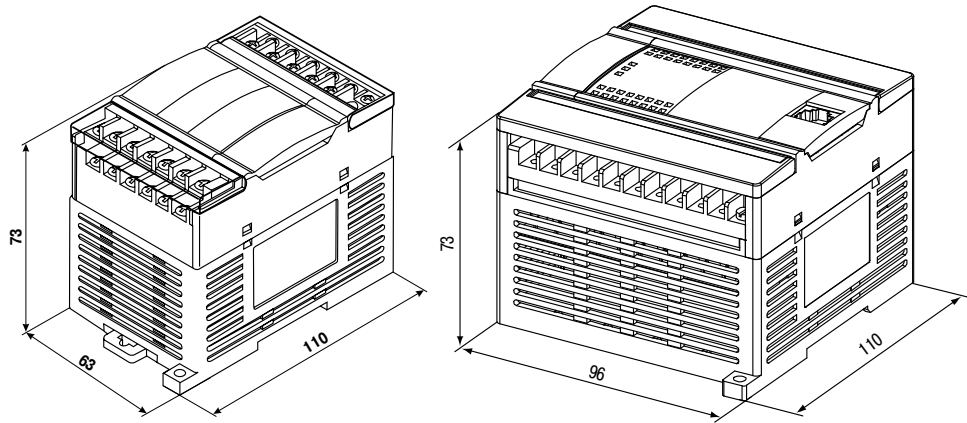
External dimensions PR110-24.8D.4R (left) and PR110-24.12D.8R (right)
